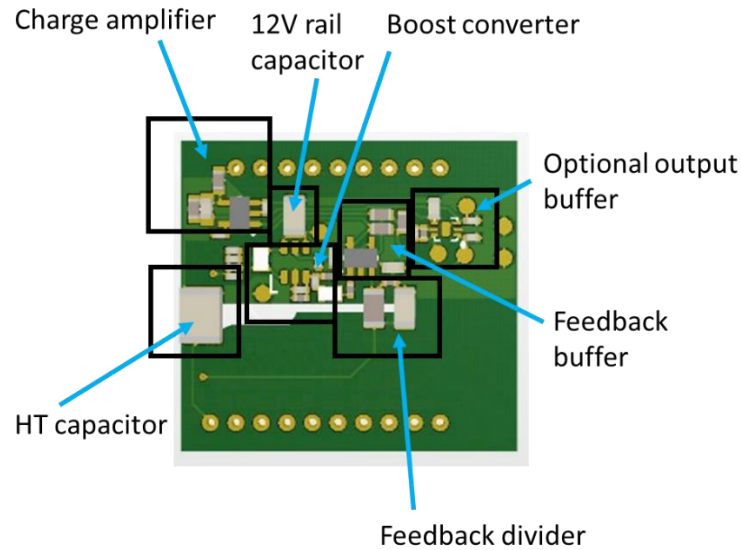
Single board layout following the same design principals (Cockcroft Walton direct circuit) under side
